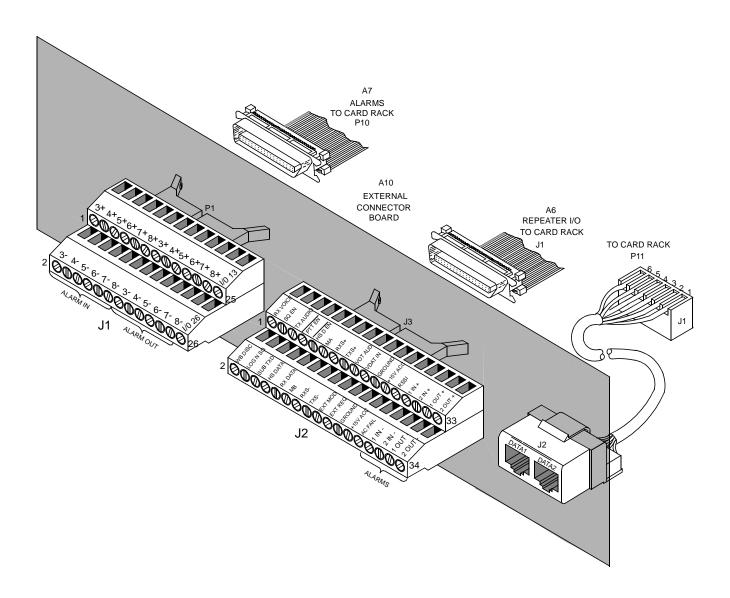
EXTERNAL CONNECTOR TERMINAL BOARDS
